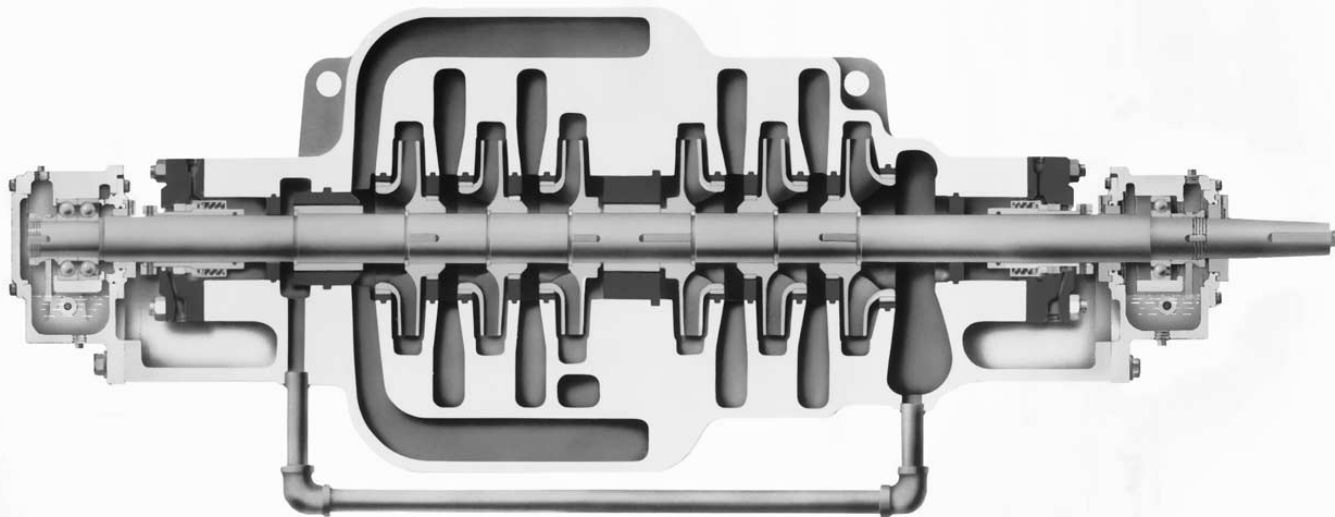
Axially split multistage pump API 610 Type BB3 (Flowsolve Corporation)
